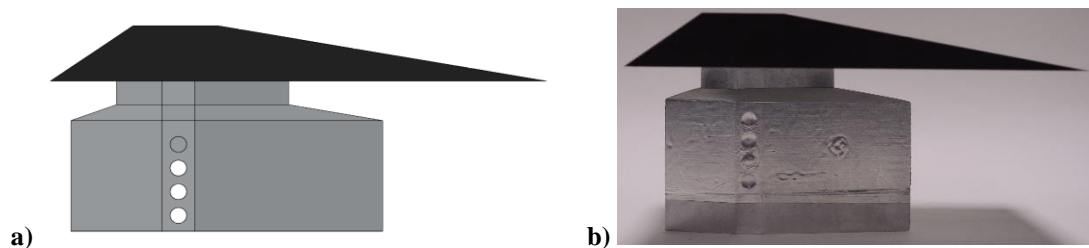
Mach stem generator wedge (thick set) model assembly side view.
